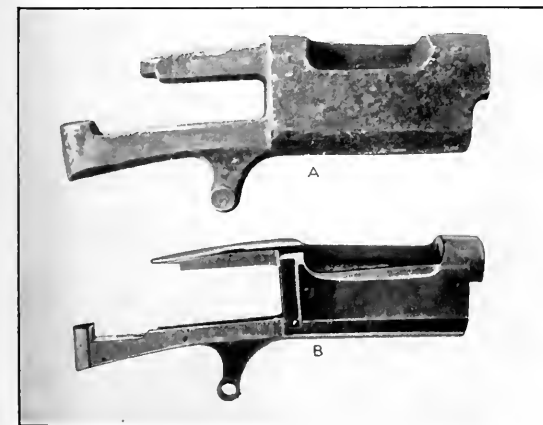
(A) Drop-forging for Receiver; (B) Finished Receiver
